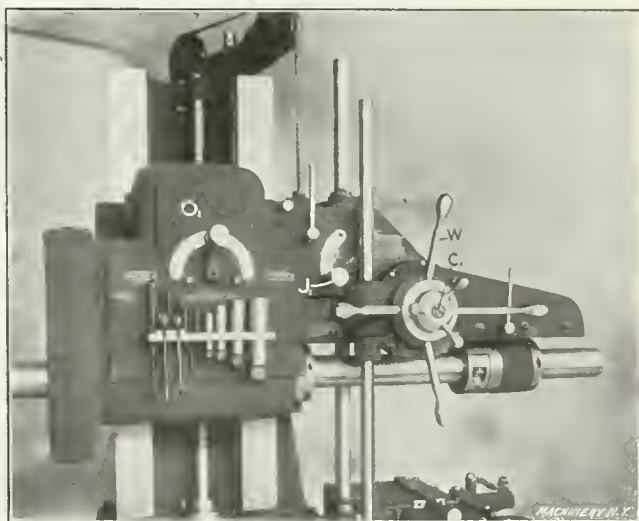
Detail View of Spindle Head, showing Operating Handles
